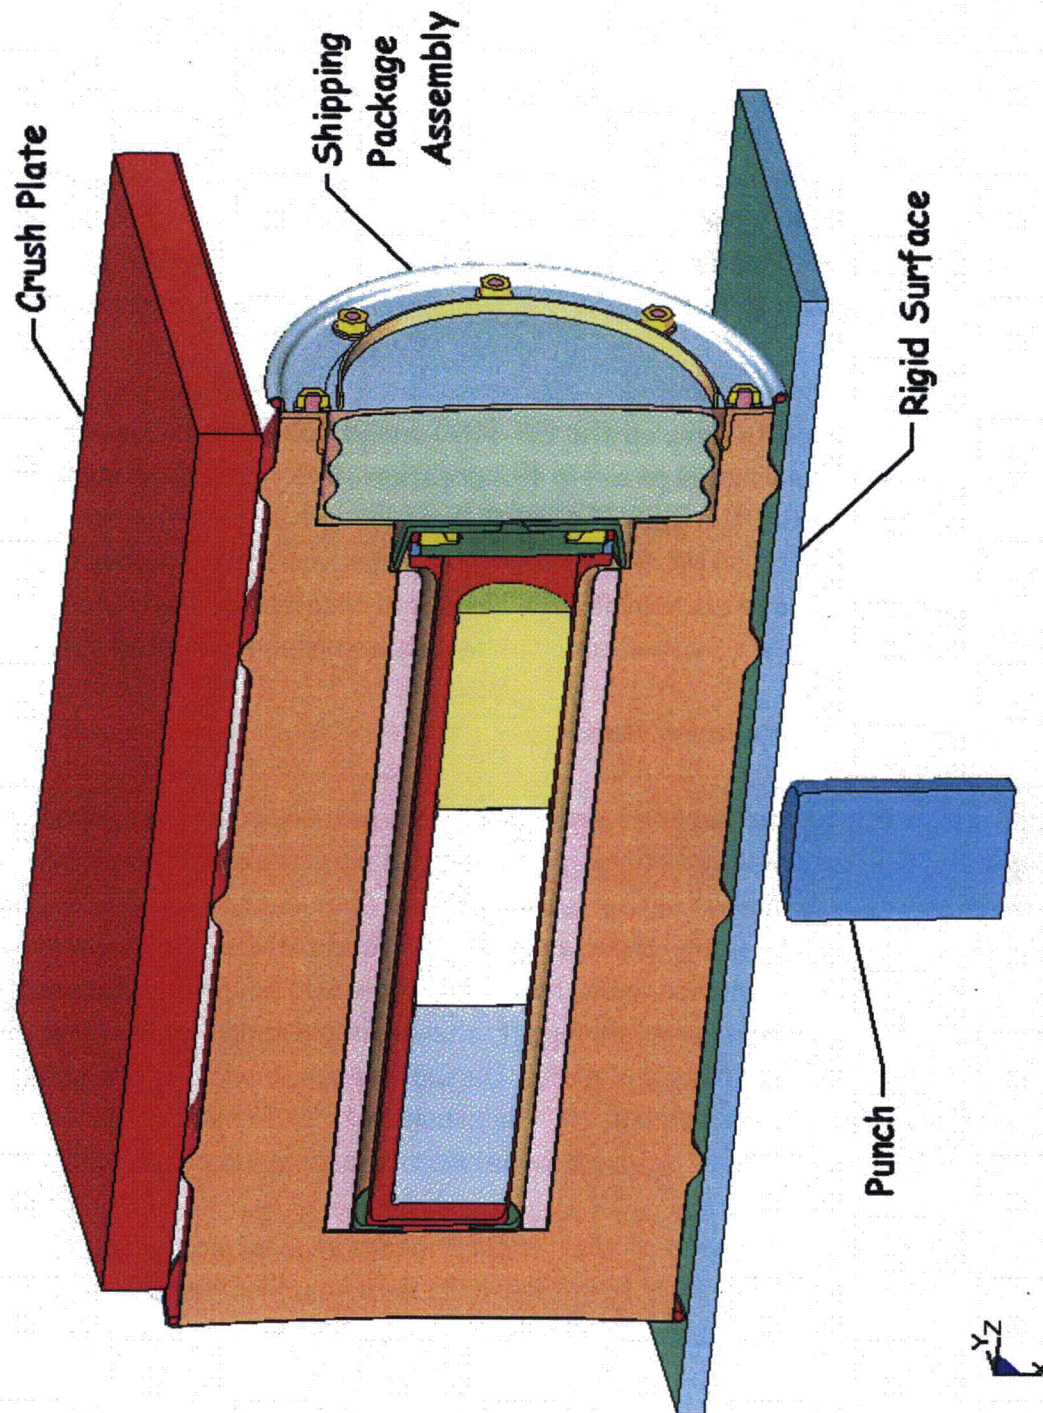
Typical ES-3100 Detailed Model Assembly
